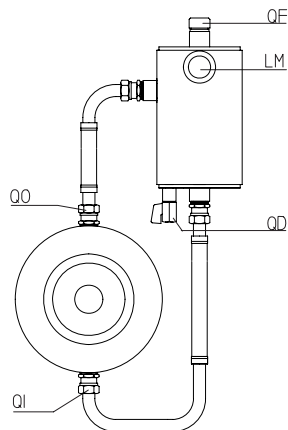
SN..ER..E QW, quench connection, horizontal pump
